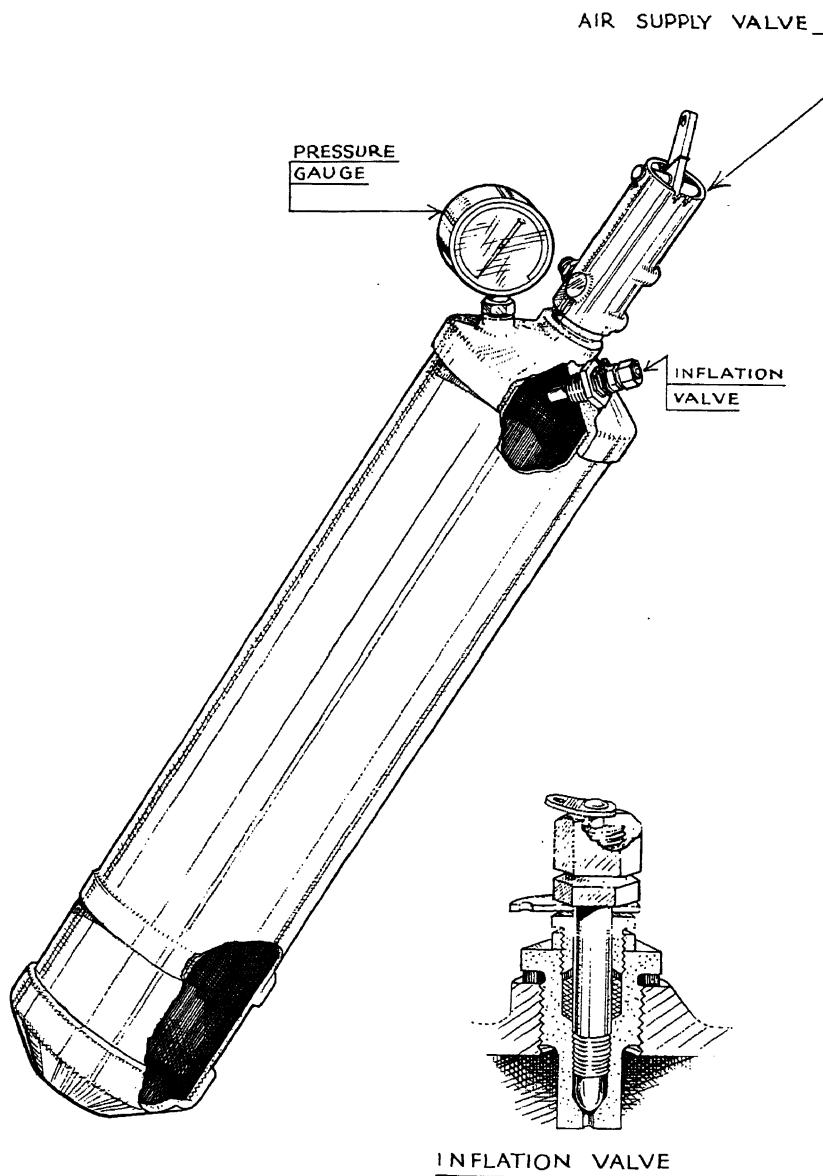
Typical Air Storage Bottle for Emergency Undercarriage Lowering
